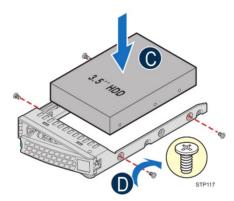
3.5" Hard Disk Drive Installation – Mounting the Drive to the Carrier
